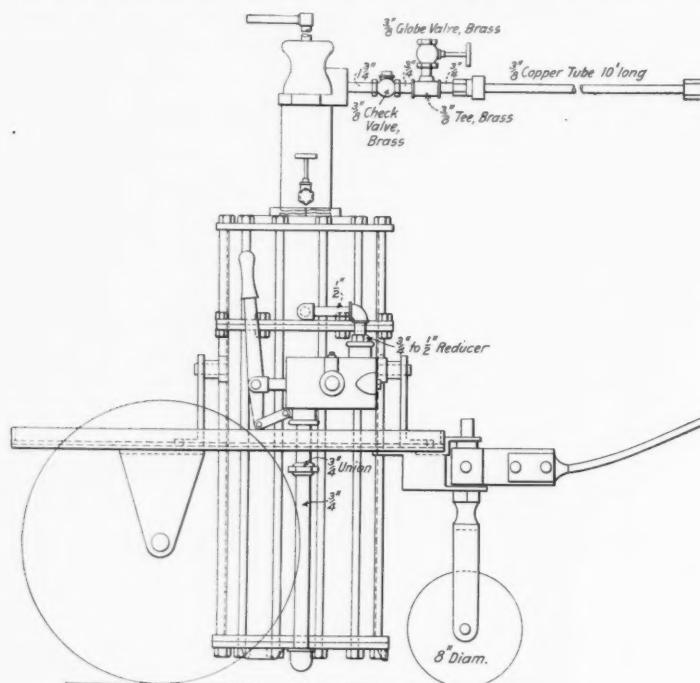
Hydraulic Press for Valve Chamber Bushings. McKernan.
